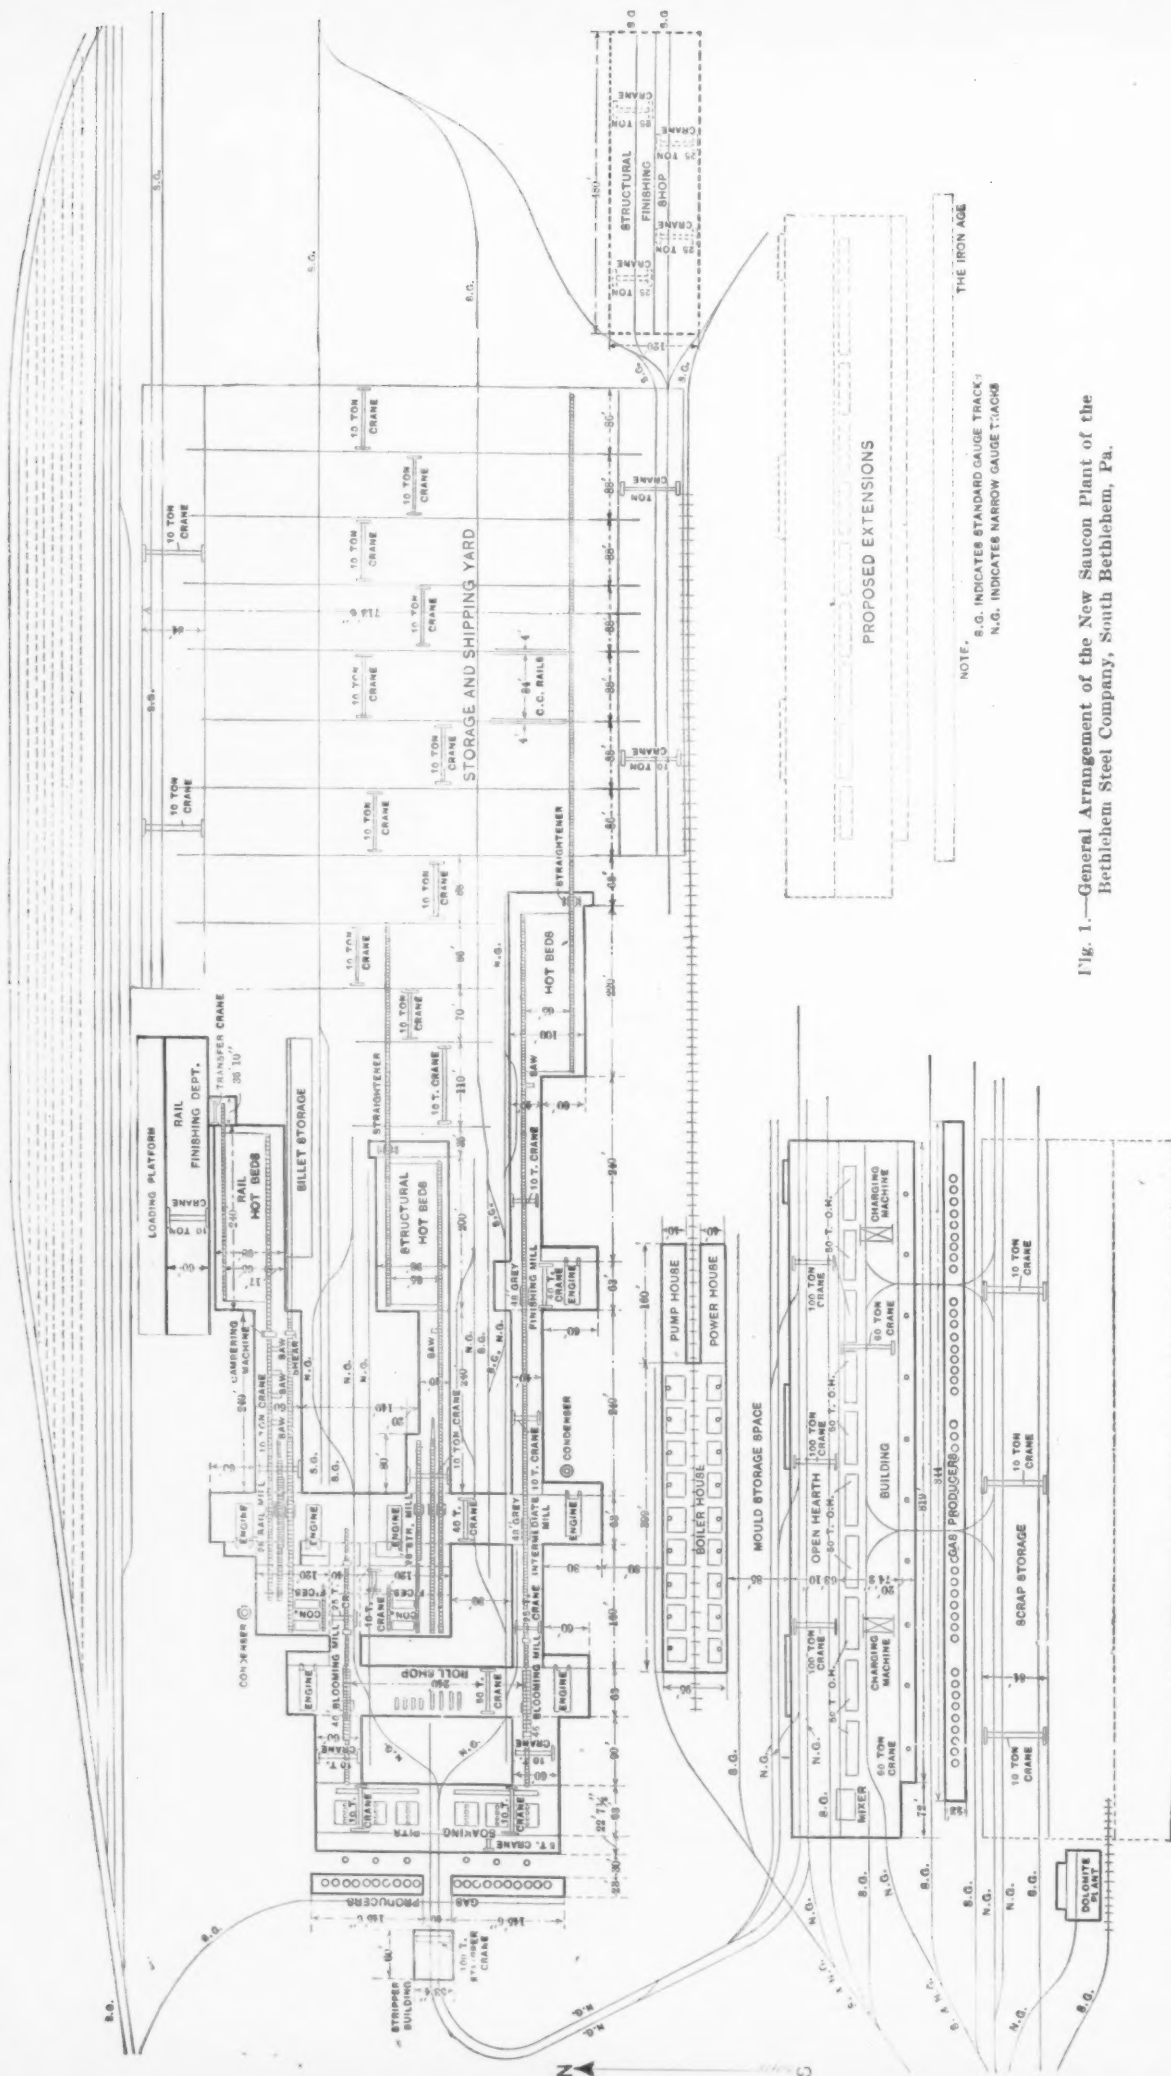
General Arrangement of the New Saucon Plant of the Bethlehem Steel Company, South Bethlehem, Pa.
